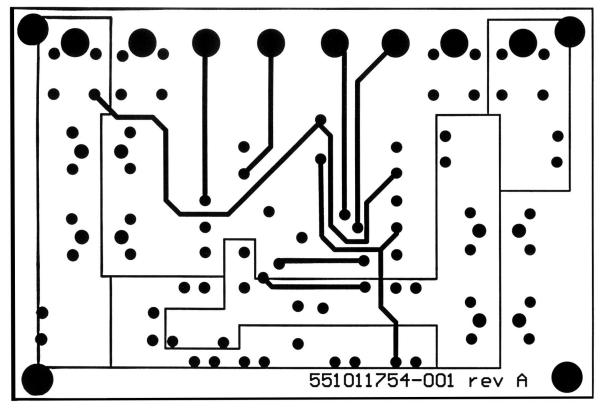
PCB Bottom Layer and Internal Power Plane
